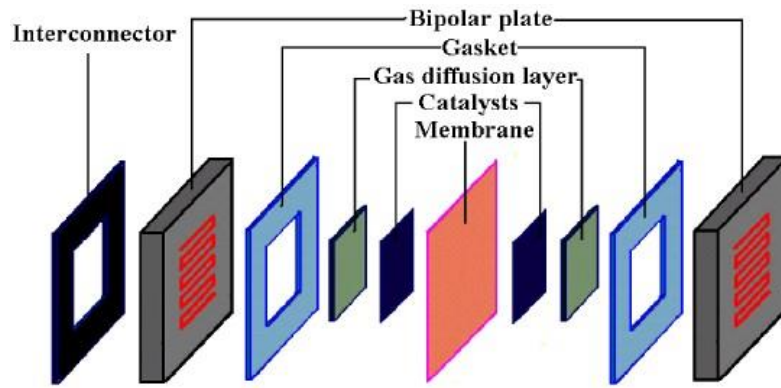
Exploded view of PEMFC components. Source: [14]
